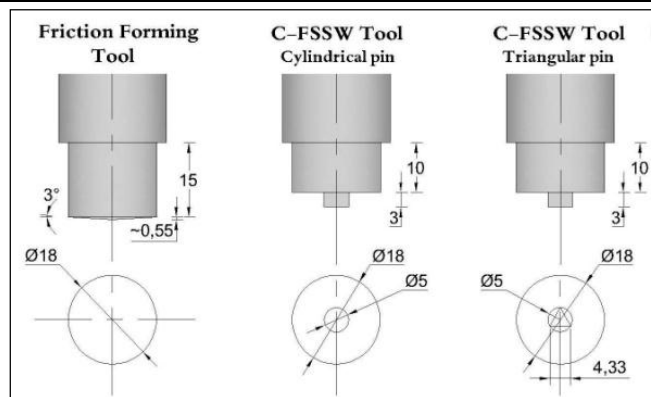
Shapes and dimensions of the conventional-and refill-FSSW tools used in this work (All dimensions in mm)
